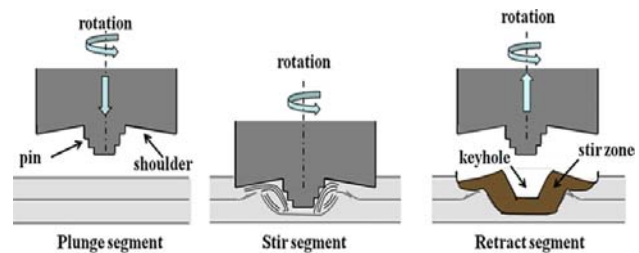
A schematic illustration of the friction-stir spot welding process [4].
